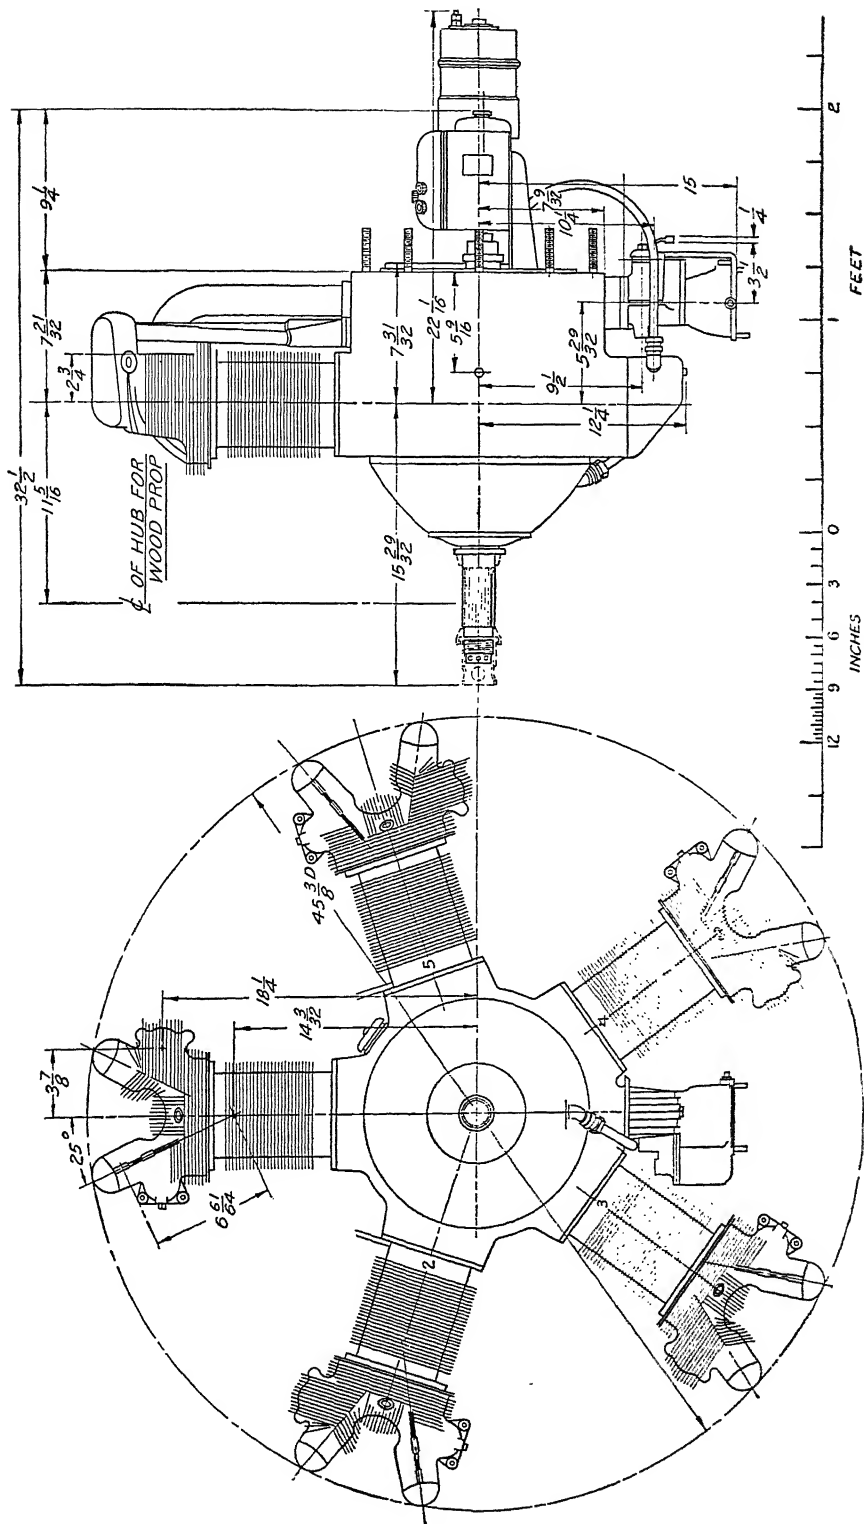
Kinner B-54 5 Cylinder Radial Engine. (*Kinner Motors, Inc.*)
